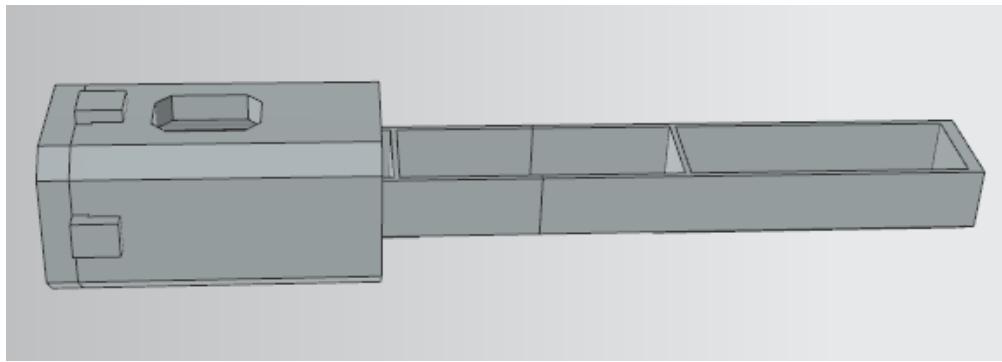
Battery “magazine” mount with part of the outer sled structure for clarity. See appendices for additional engineering drawings and dimensions.
